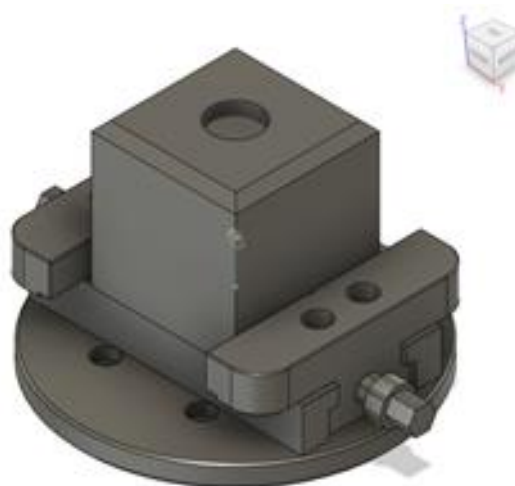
Part 4 with a block dimension of 60x60x60 mm to be machined using 5-axis continuous toolpaths
